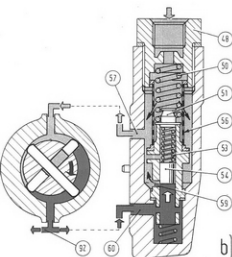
Transfer Pump and Regulating Valve Operation Diagram
